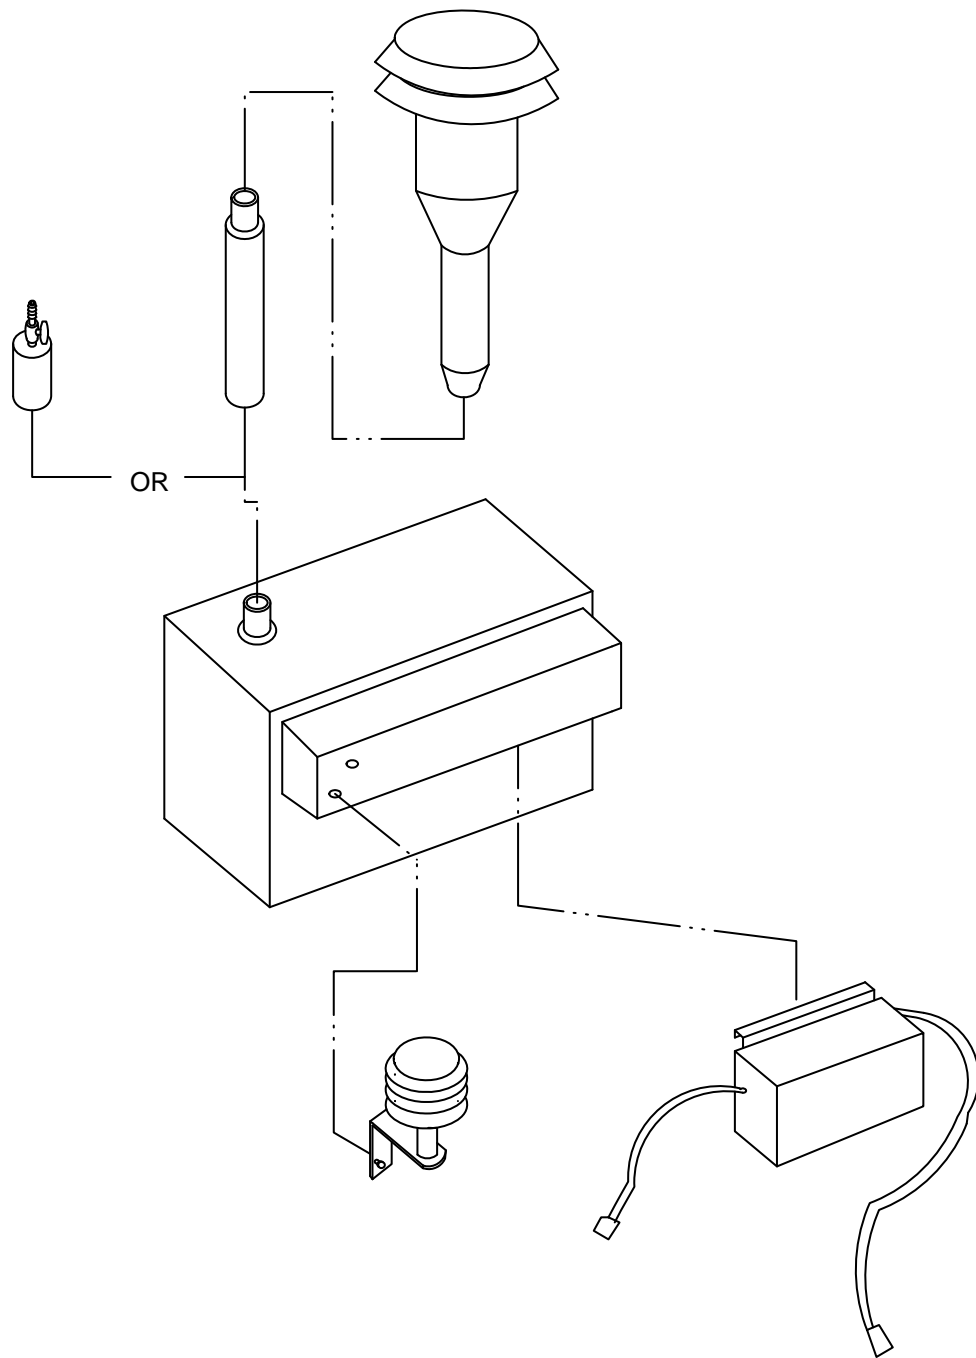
EXPLODED VIEW OF COMPONENTS INSTALLED IN BACK OF INSTRUMENT
